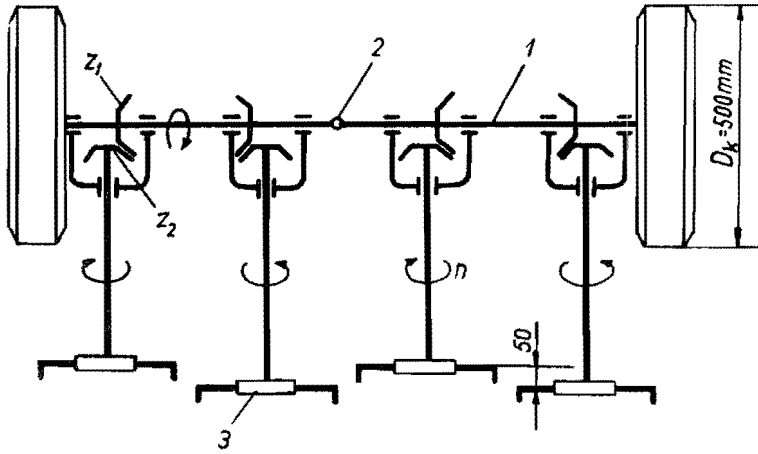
Example of a four-row rotary thinner: 1—square shaft; 2—articulated joint; 3—cutting head.
